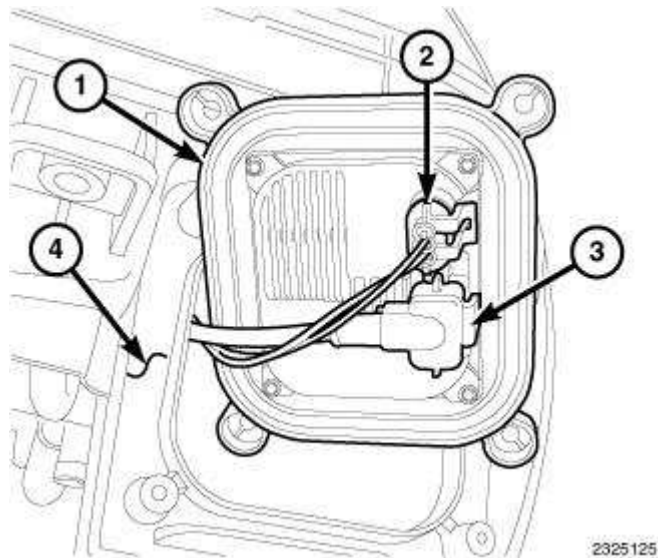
Identifying High Tension Cable Connector, Wire Harness Connector & Ballast Module
